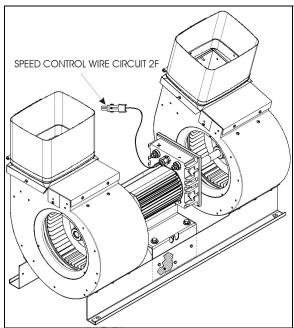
EVAPORATOR MOTOR ASSEMBLY
